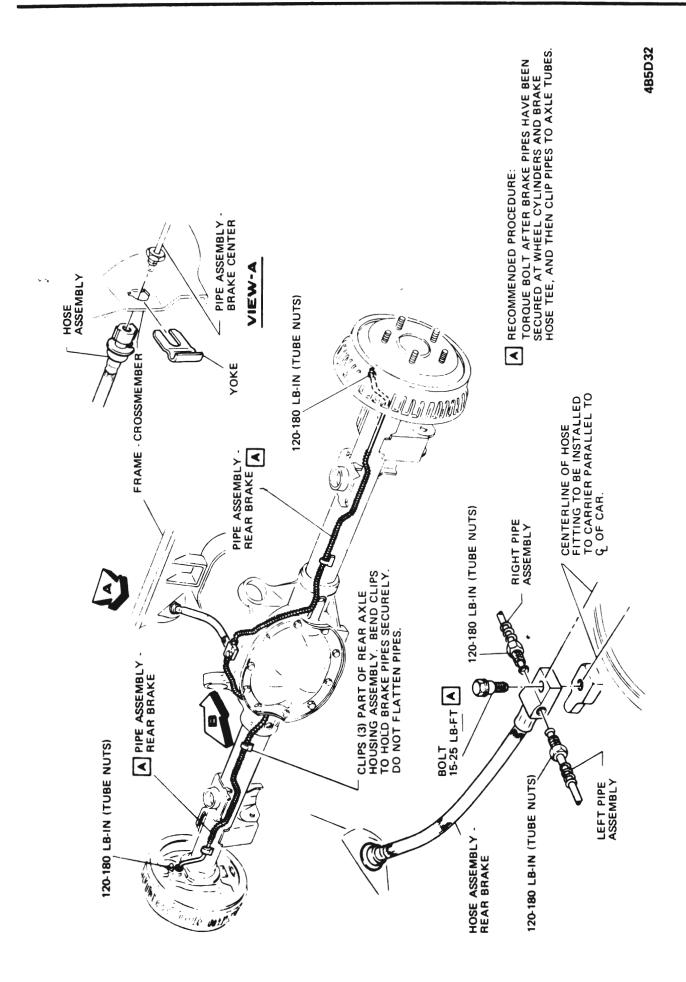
D-32 Rear Brake Pipes - B-C-E Car
